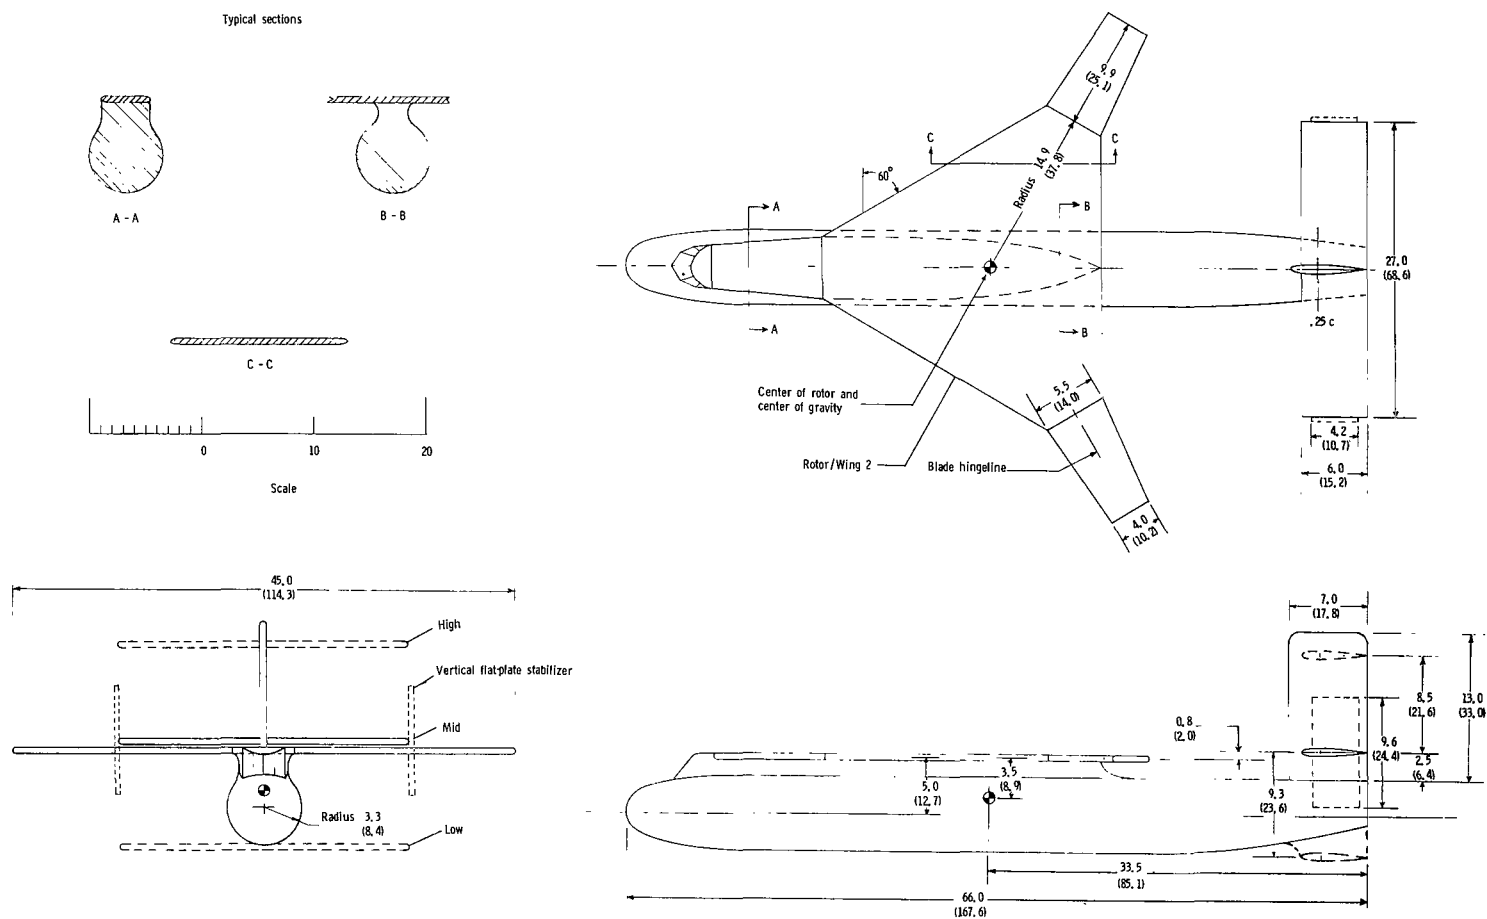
Drawing of model with rotor/wing 2. Dimensions in inches (cm).
